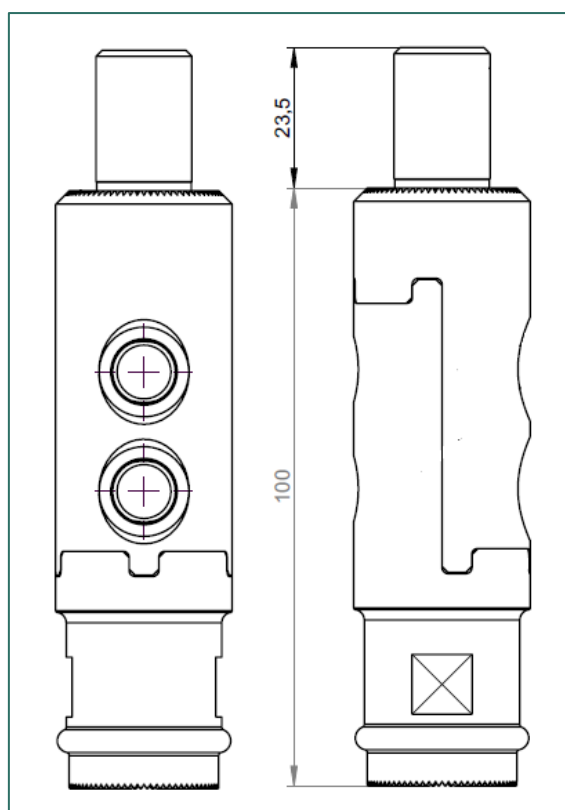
DIMENSIONS OF THE MUTARS® CONNECTING PART
